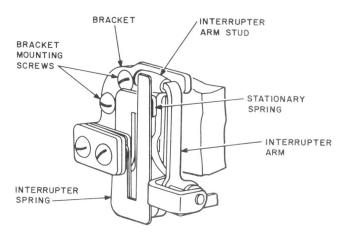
Bell-Crank-Type Vertical Interrupter Spring
